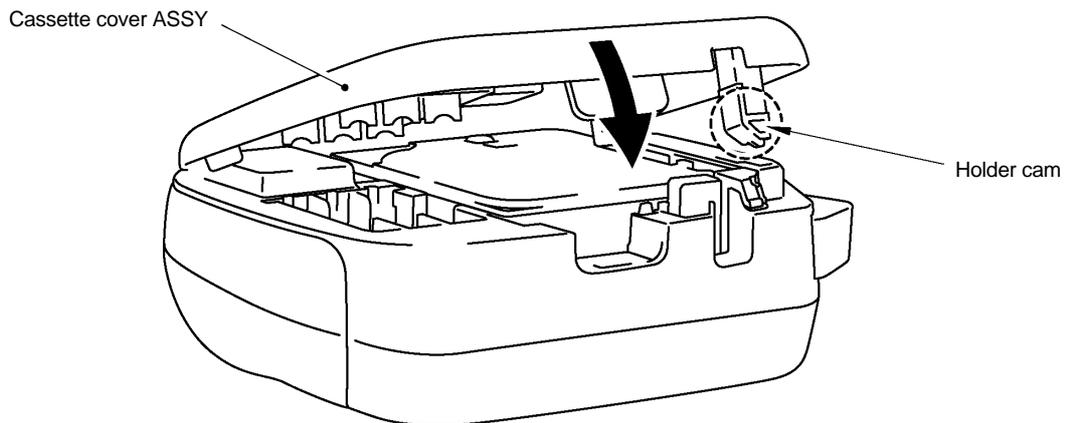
Interlock Mechanism of the Roller Holder
